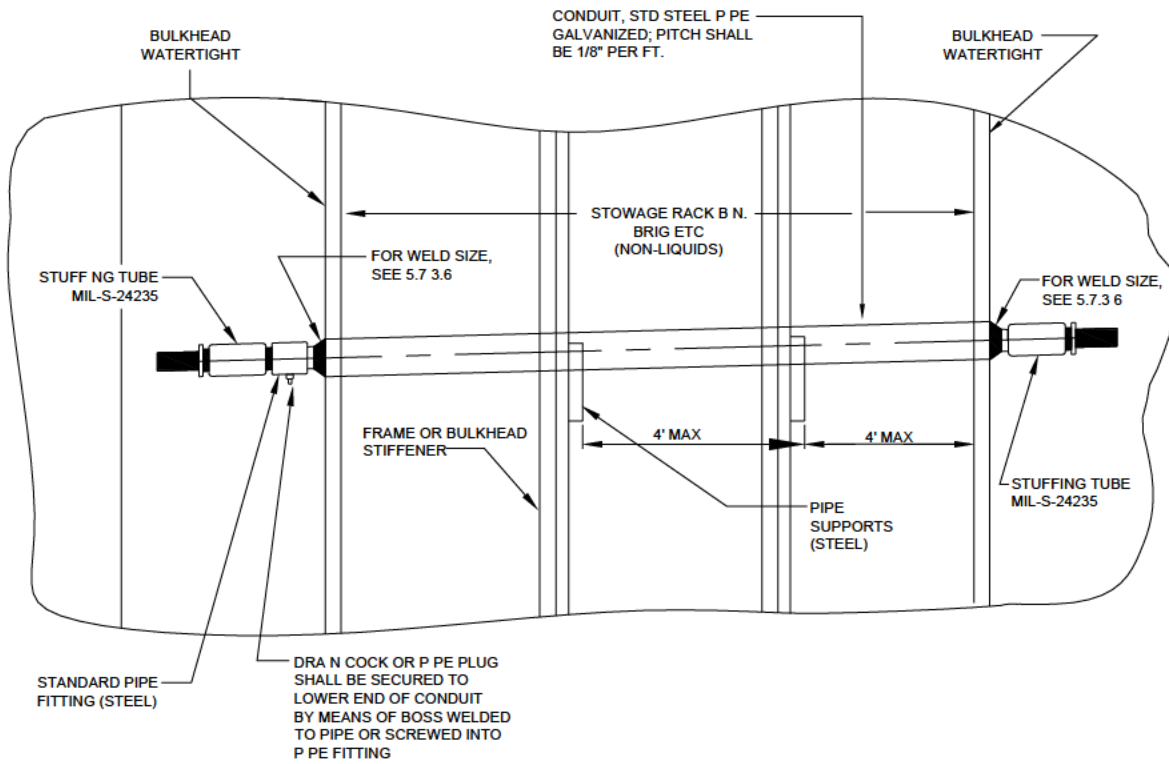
B45. Cableways through storage spaces and tanks (surface ships).
